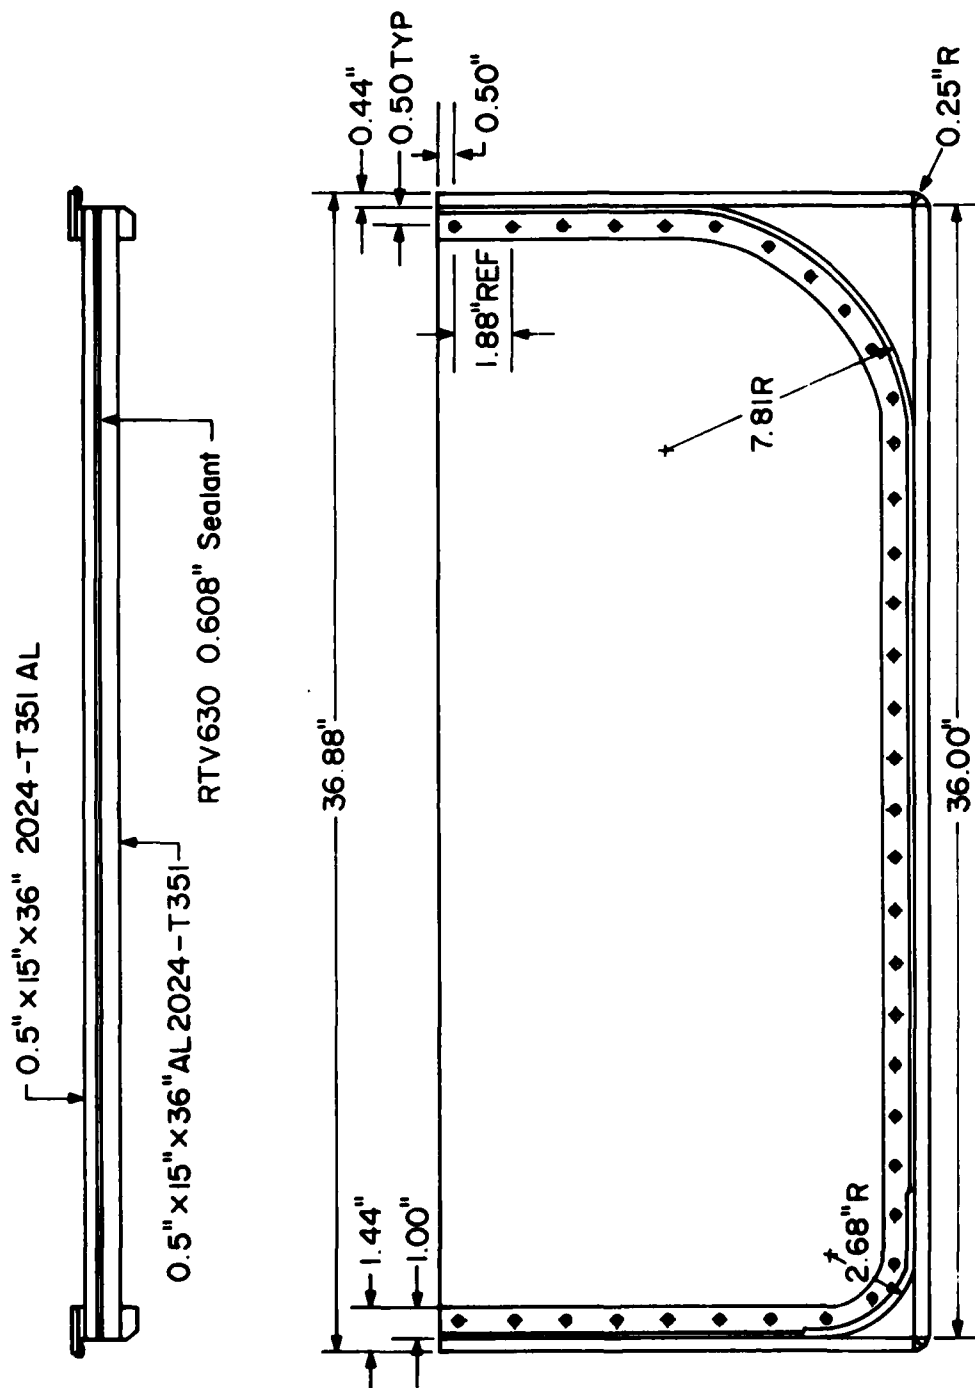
49 Laminate Partial Windshield Panel in Support Fixture.
